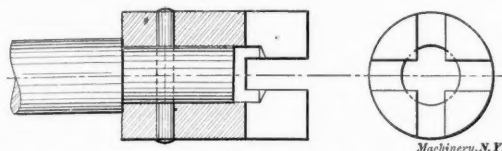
Drive for the Mechanism of the Tool shown in Fig. 10.
